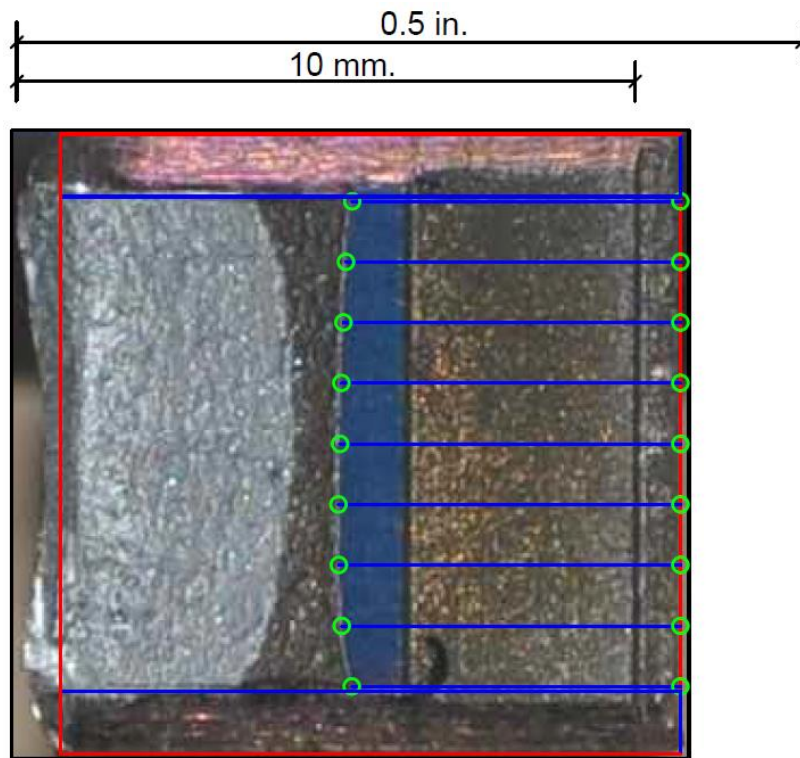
Specimen E16' Fracture Surface
